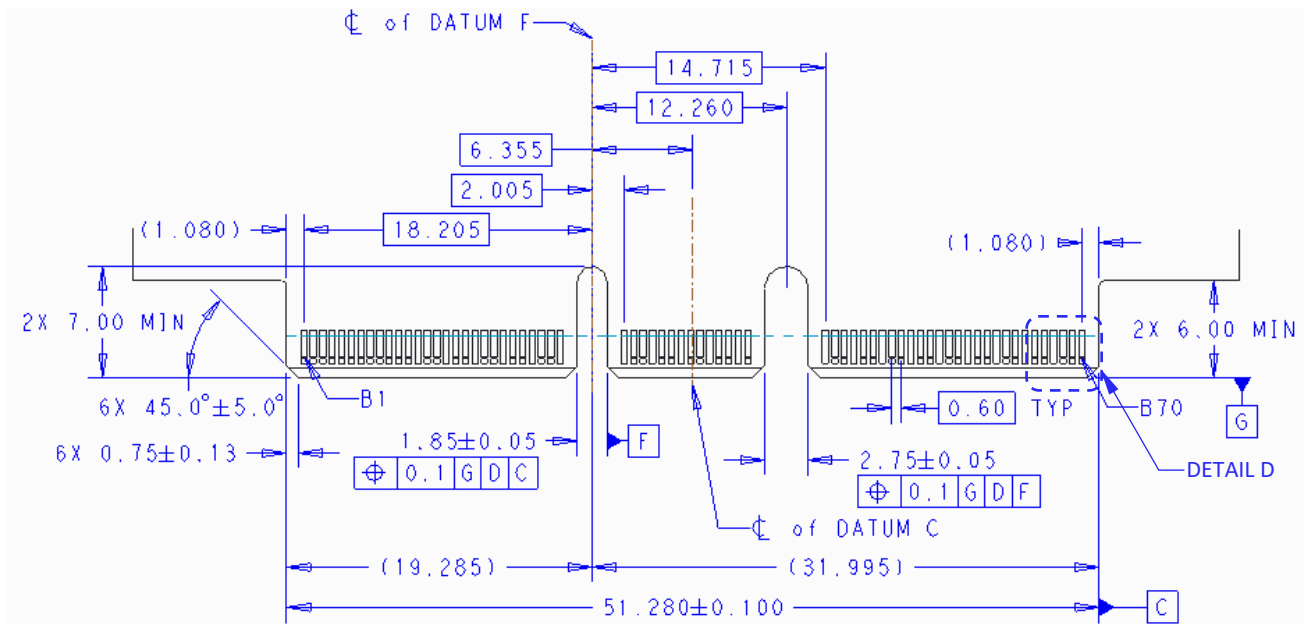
AIC 4C MATING CARD DIMENSIONS
